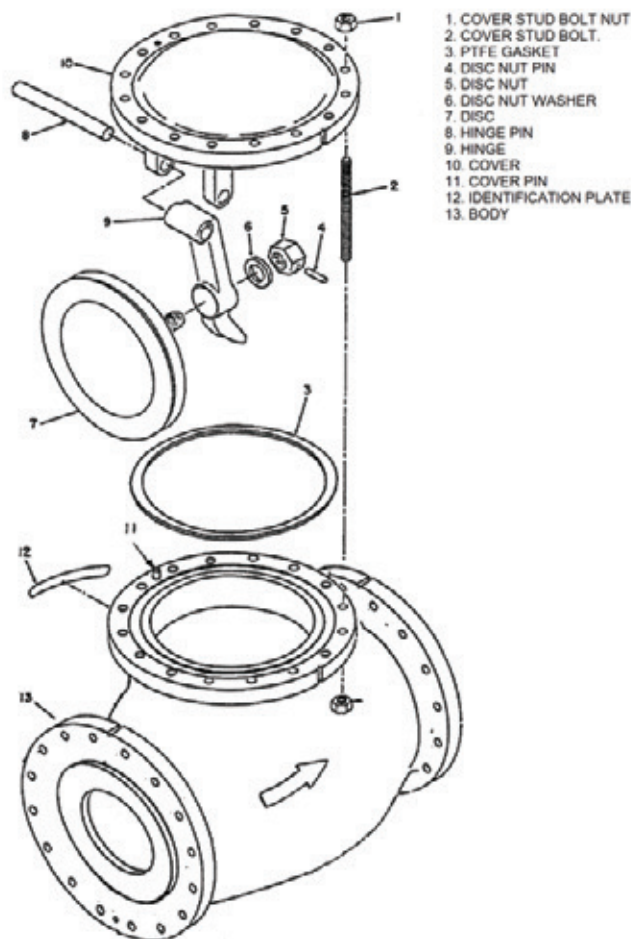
TYPICAL SWING CHECK VALVE EXPLODED VIEW
